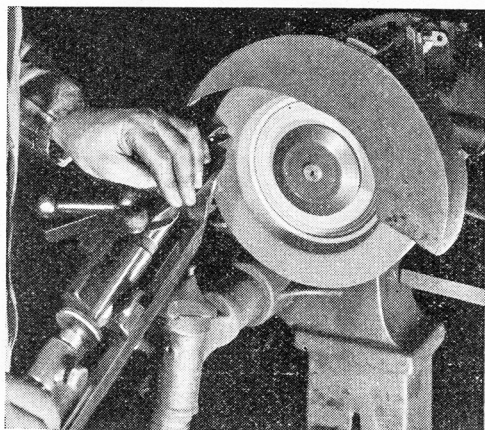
Machine grinding is recommended for the accurate sharpening of drills.
